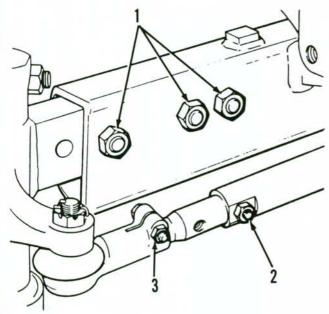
View of axle left end typical of type used on 399 models. Right side is equipped with a similar track rod, adjusting bolt (2) and rod end. Rod end may be locked with clamp bolt (3) as shown or jam nut.
